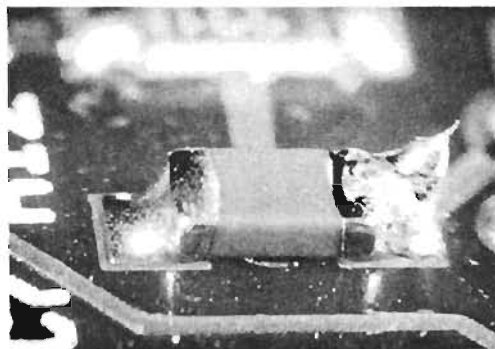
Solder spikes on surface mounted component (EPS)
